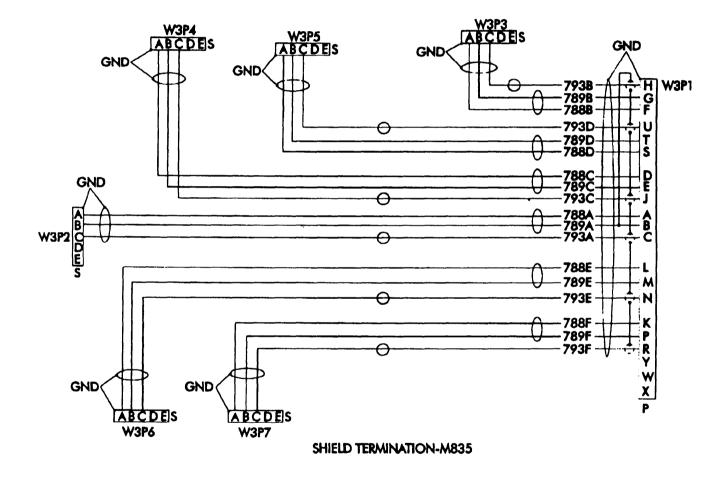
Crew Fire Extinguisher Cable Assembly (12352315)
